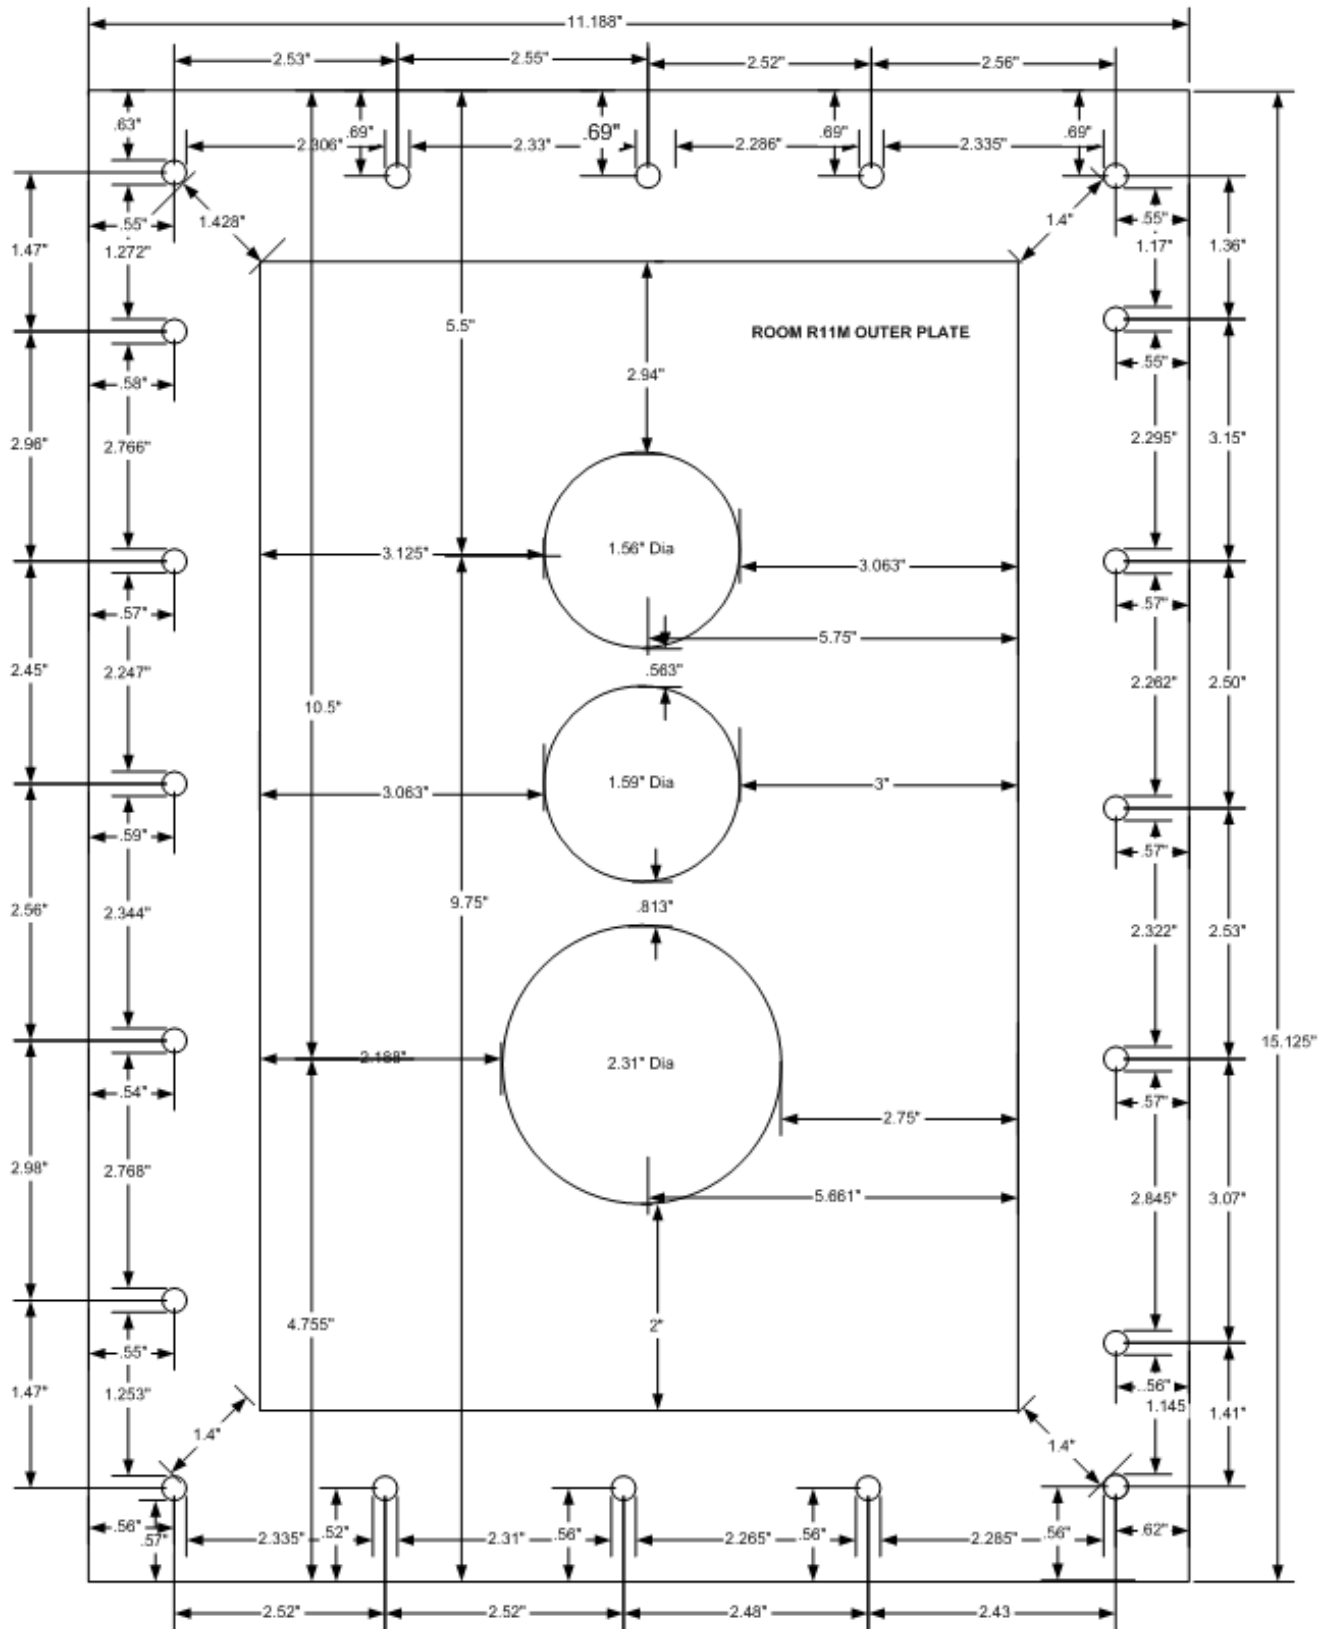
Room 11M (Test Room) Outer Mounting Plate Dimensions
